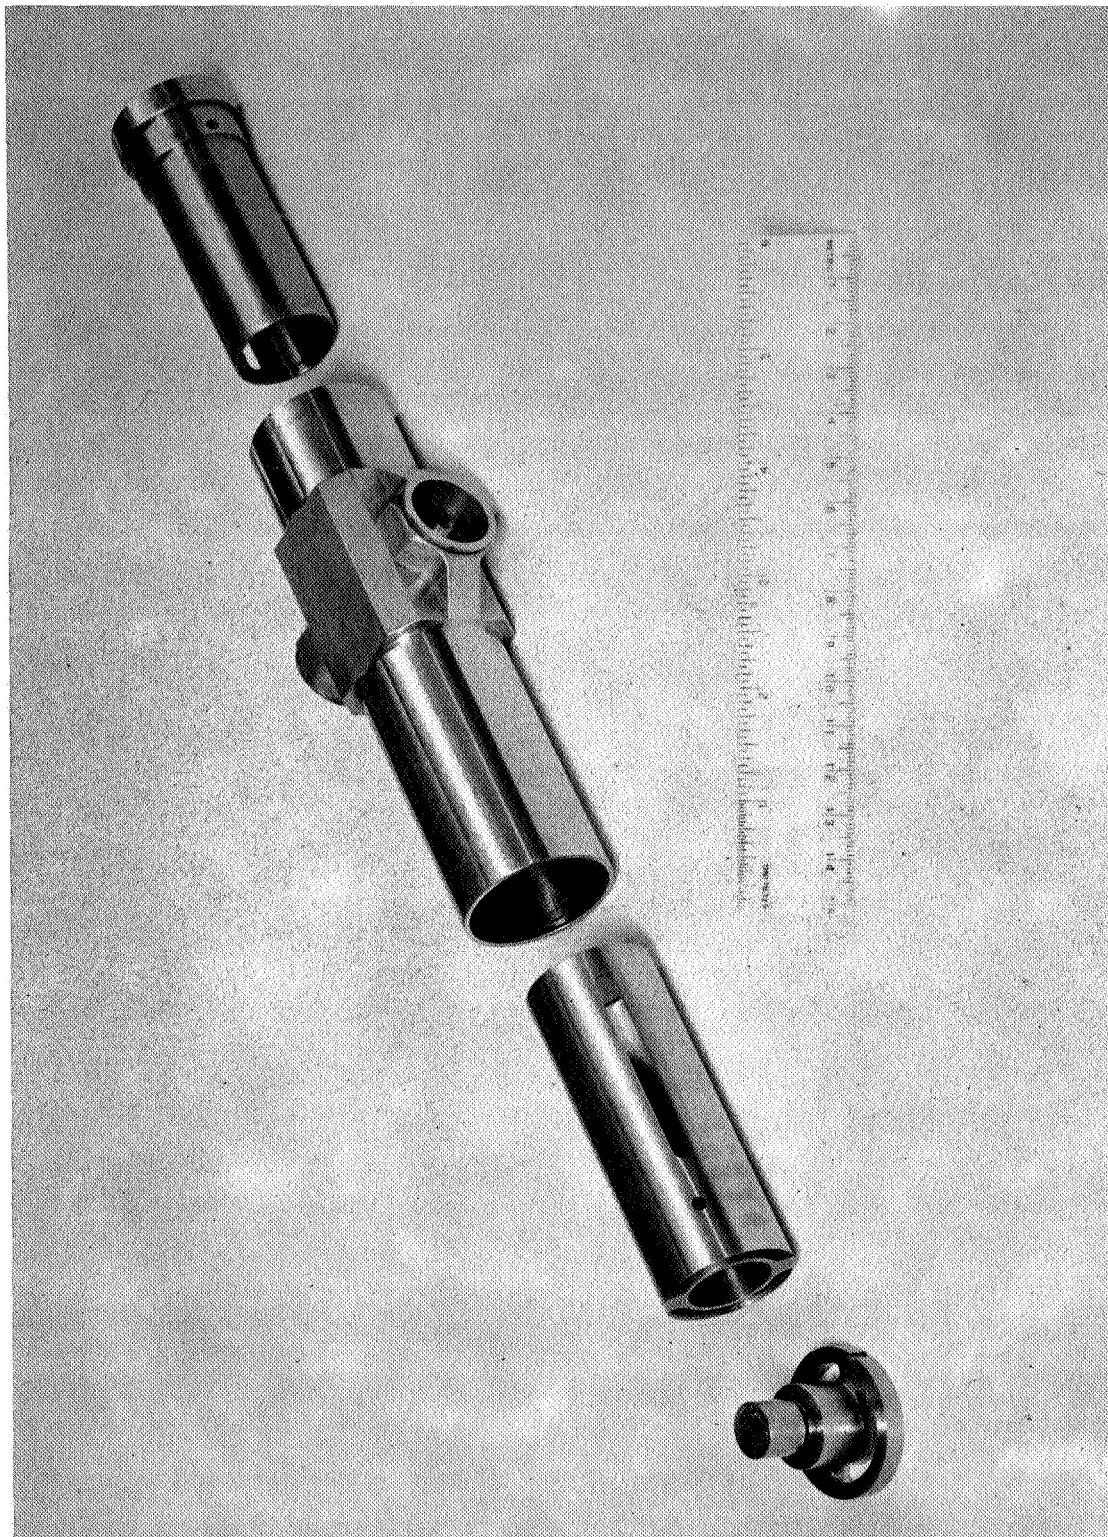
Photographic exploded view of the flexure-pivot oscillating valve.
